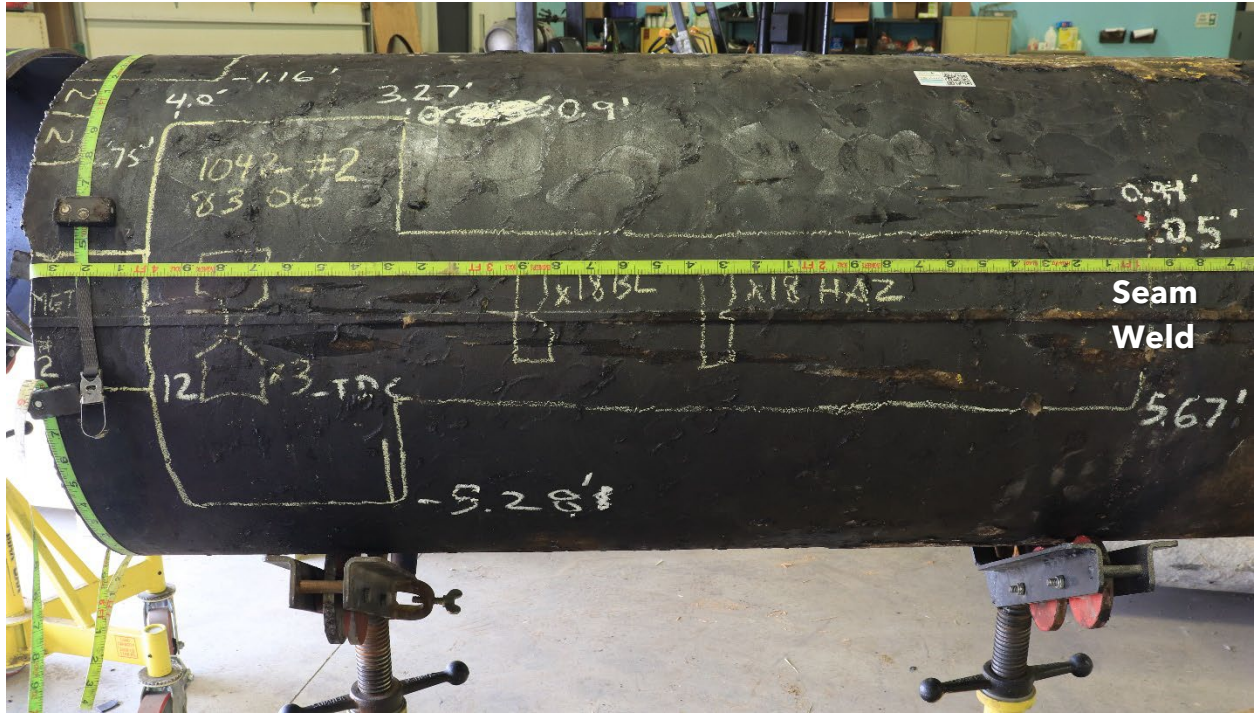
View of the outer surface of Pipe 1, showing areas annotated for extracting tensile impact test specimens across a seam weld, their numbers, and orientations.
